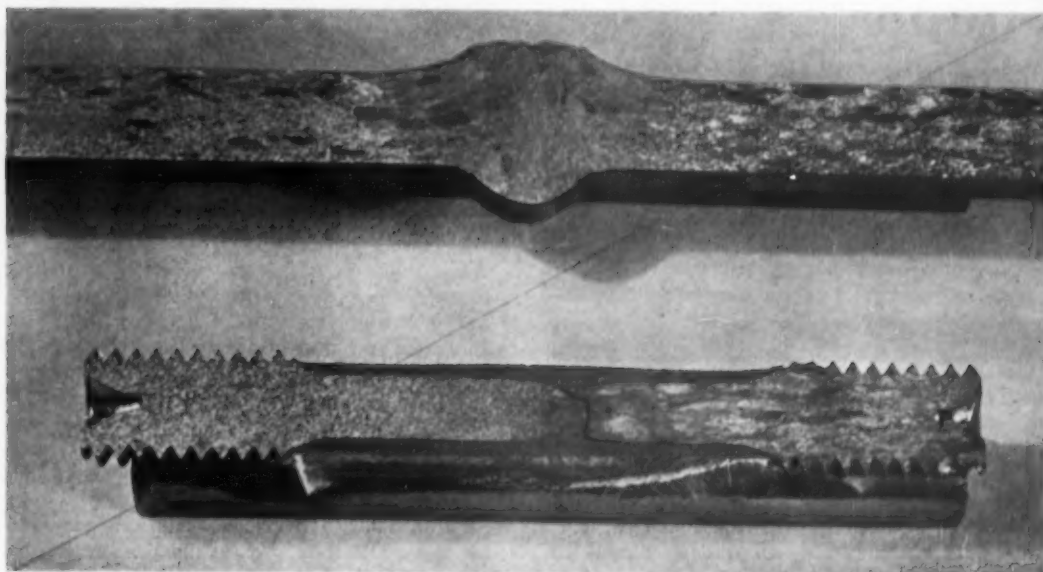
Comparison of macrosections through weld zone and through weld tensile specimen.
